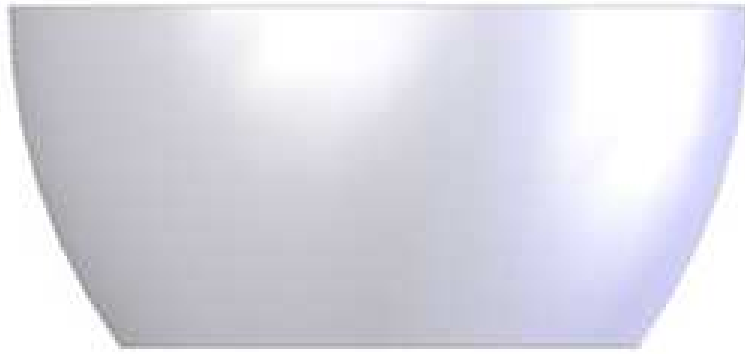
Lower Copper Hemi-Sphere. Dimensions are shown on technical drawings and given in appendix B with Part number 2.
